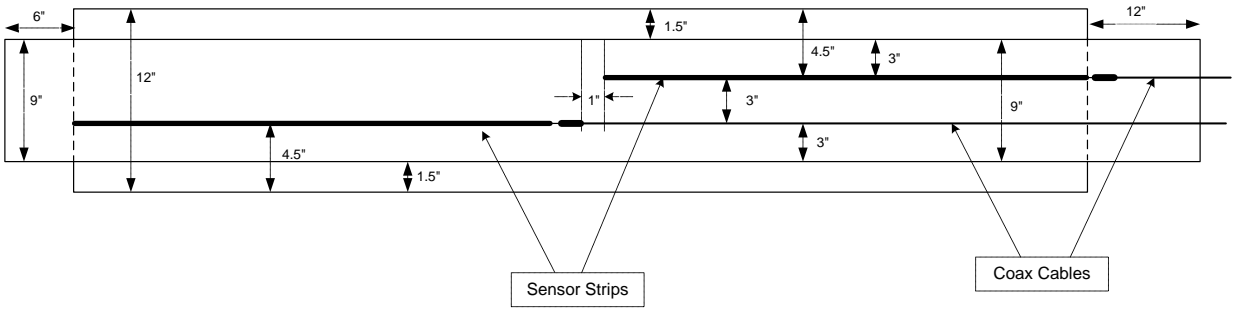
Dimensions of the Two-lane, single-strip weigh-pad: top view
